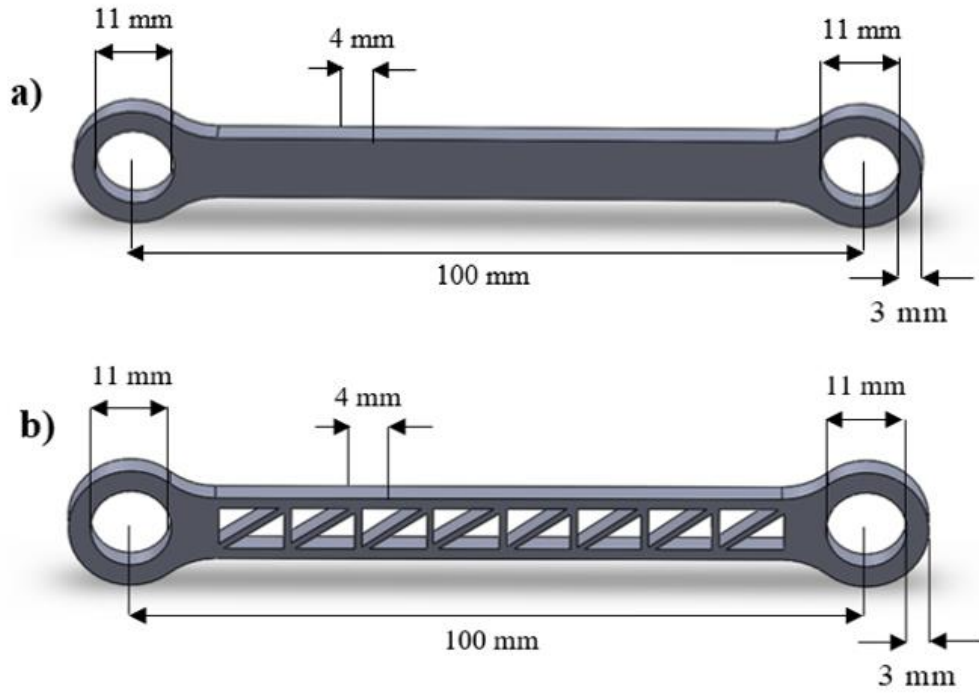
a) One outer arm of the single-stage, compound and nested IAs. b) One outer arm of the single-stage truss, compound truss and nested truss IAs.
